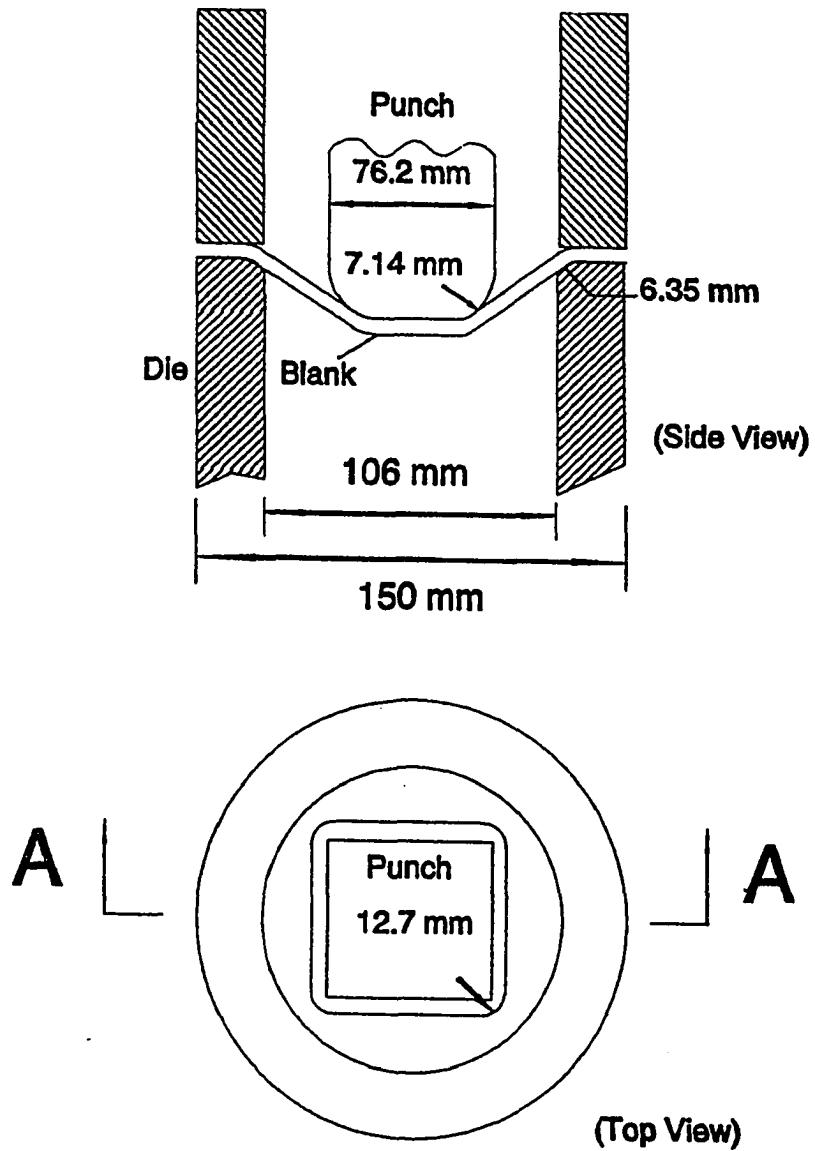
Deep drawing using flat bottom square punch. Tool geometry and deformed sheet shape. (Saran, et al., 1990b)
